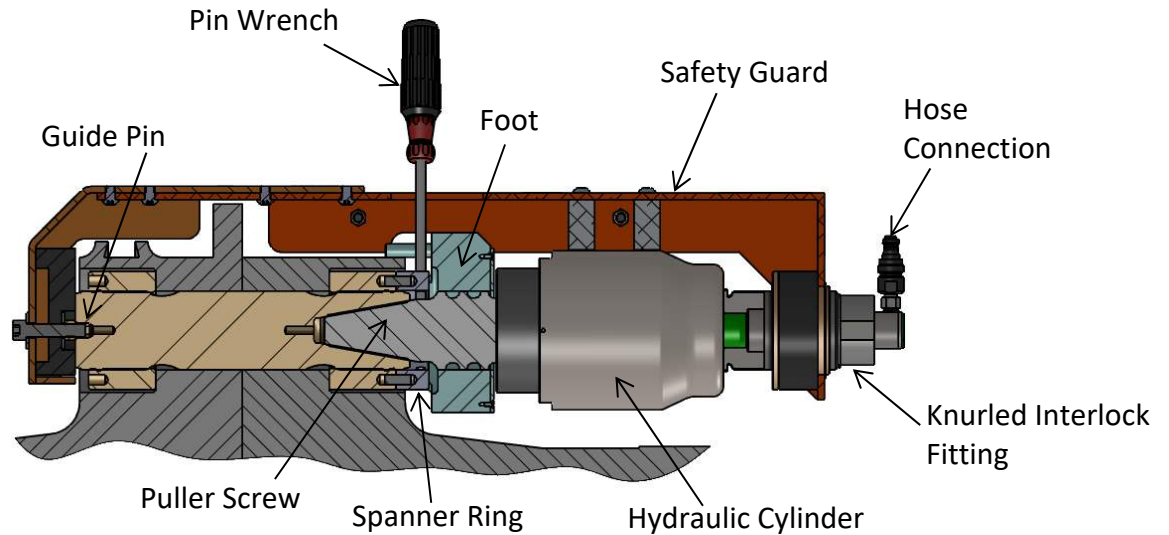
B – Cutaway view of Hydraulic Tensioner HT-5425, HT-7979, and HT-8133
